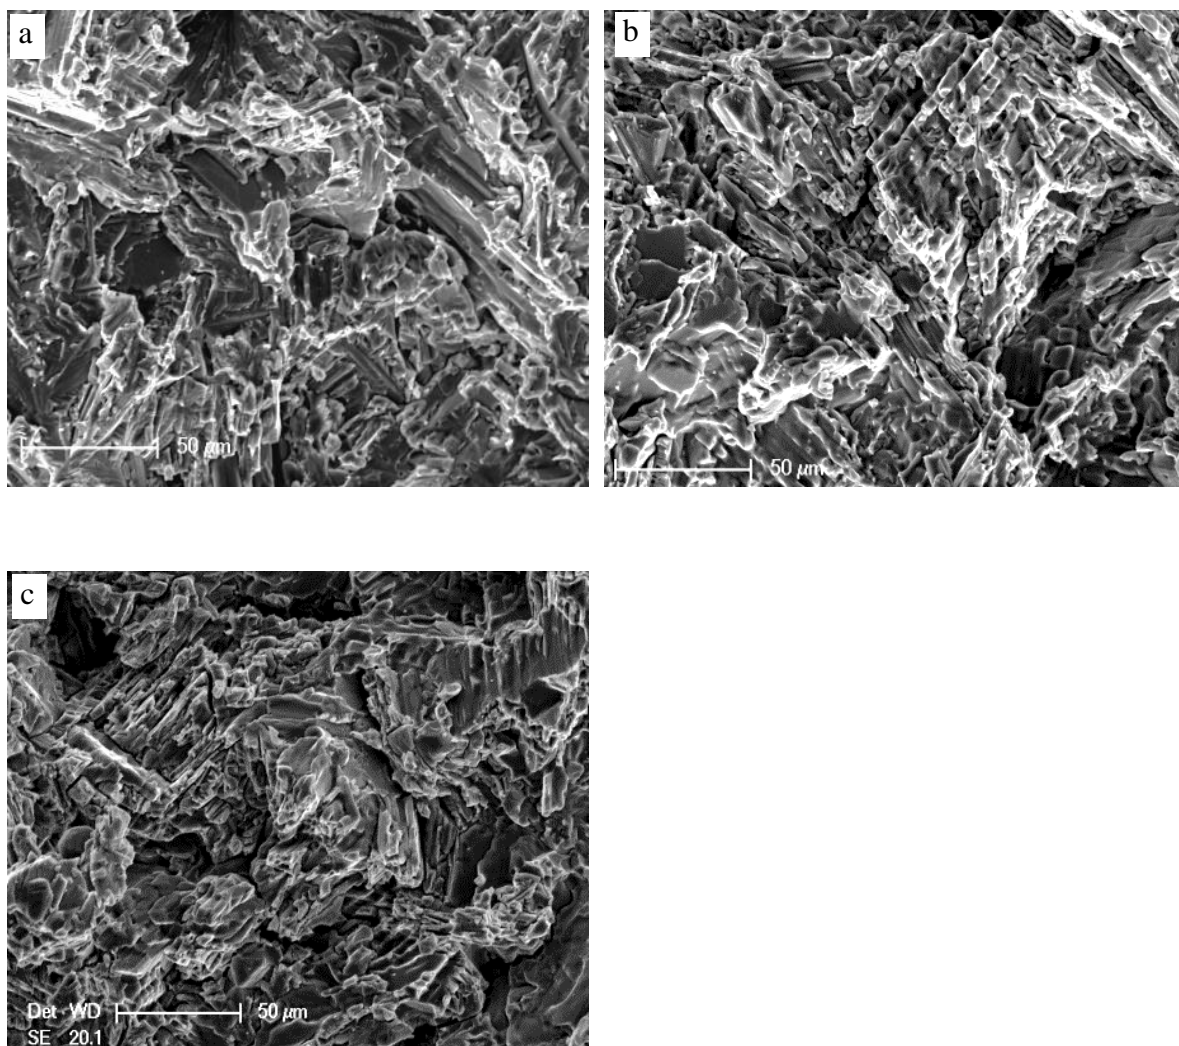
SE SEM images of fracture surfaces of the failed tensile test pieces tested at (a) room temperature, (b) 450°C and (c) 650°C.
